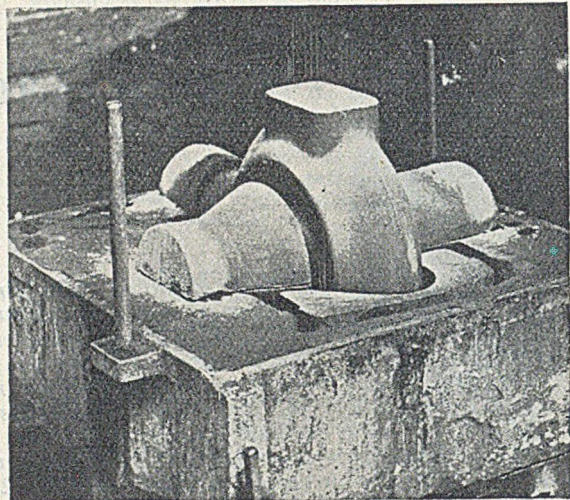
Mould for Hydrovac Casting for Dust-handling Equipment with Top-part removed to show the Intricate Core.
